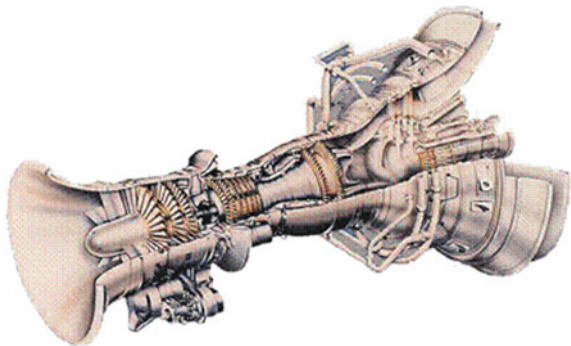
UGT 16,000 with axial-type inlet casing
